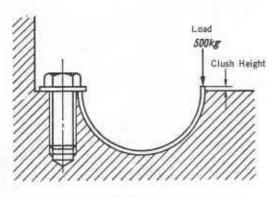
Checking Clash Height of Main Bearing Bushing
